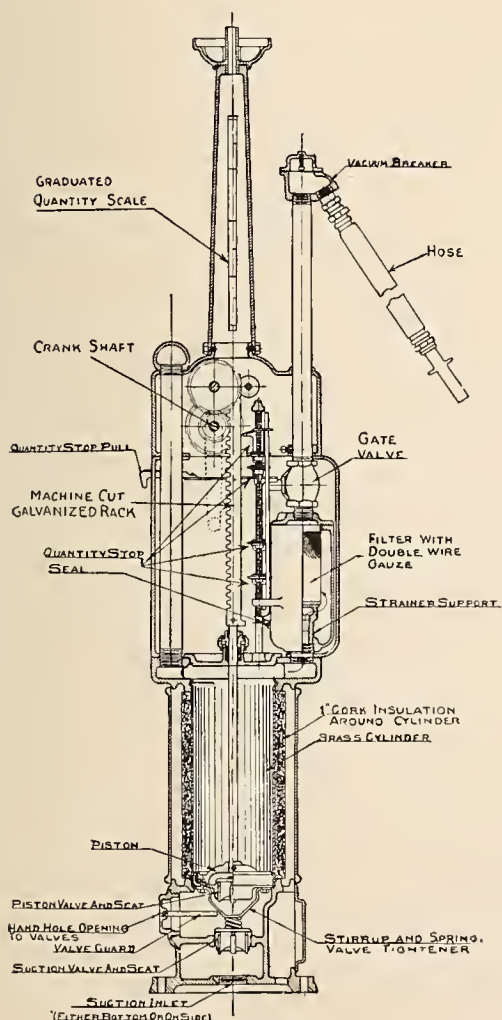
Sectional elevation of typical piston-type measuring pump
